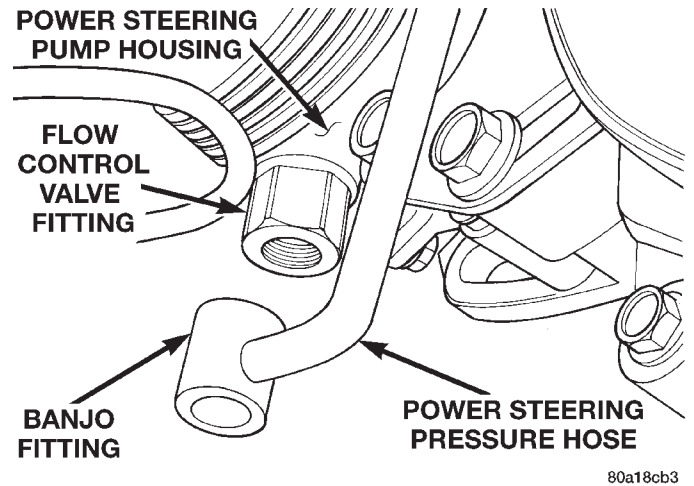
Pump Discharge And Flow Control Valve Fitting
